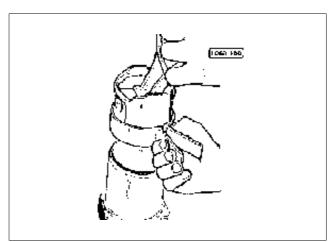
Fitting the piston-connecting rod assembly into the cylinder;
